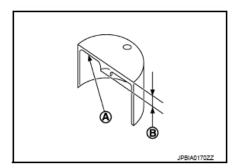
Identifying Valve Lifter (EXH) Thickness Courtesy of NISSAN NORTH AMERICA, INC.
